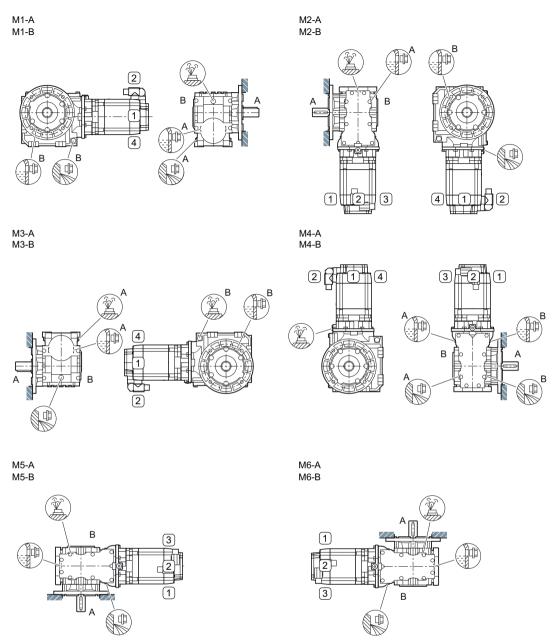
Mounting positions for servo helical worm geared motor CF (flange design) and CAZ (housing flange design), frame size 39A, 2 stage
